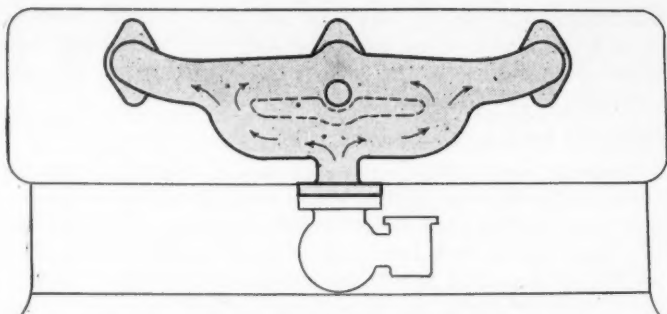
Intake for six in which distance from carburetor to valve is equal for all valves
